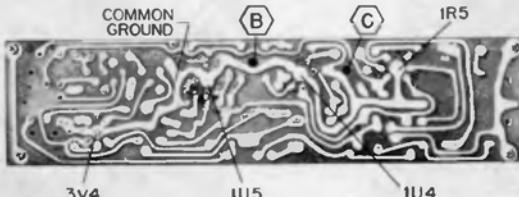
Bottom View of Chassis 200. Tube Locations and Alignment Points Shown.
